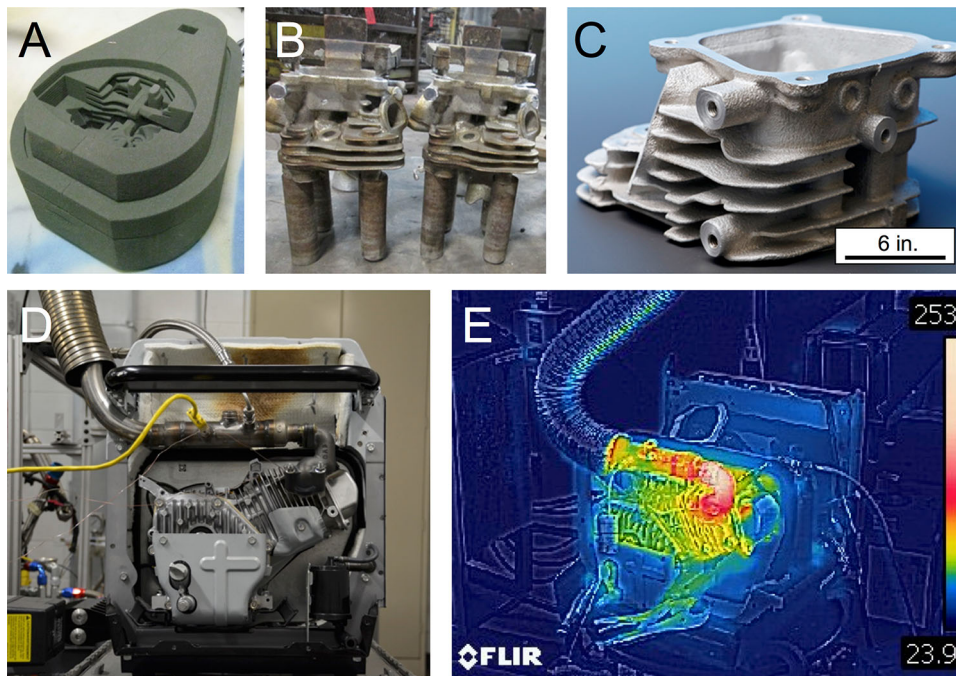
(a) Additively manufactured sand mold, engine head after (b) casting and removal of mold and (c) gating removal and sand blasting, (d) assembled engine, and (e) thermal image of engine in operation.
